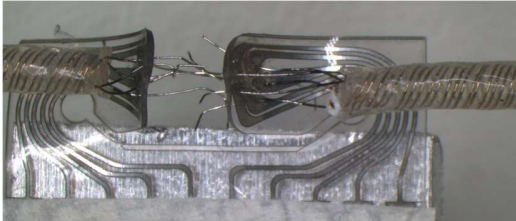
The cable connection arrangement with solder pads at to 60° to aid connection and parallel Cooper Cables. Jig not shown.
